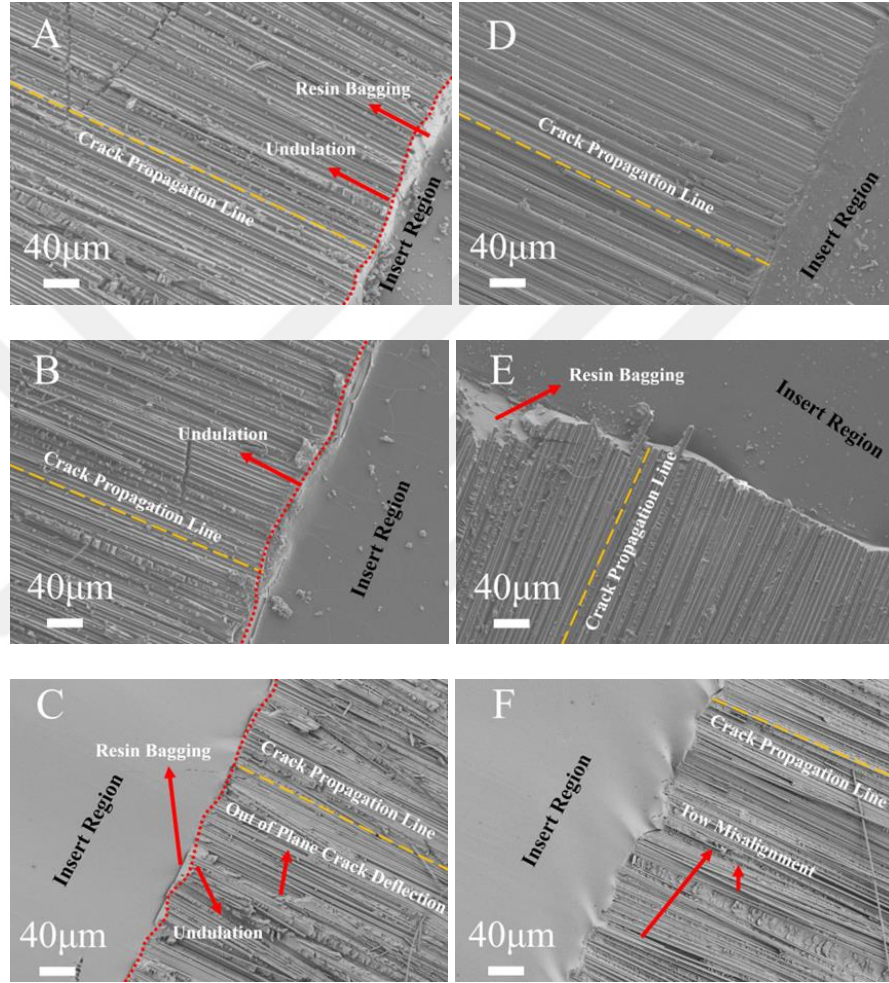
Fractography images belonging to the pre-cracked region of fractured ENF samples; left shows RT sample: (A) CFRP-CC resin; (B) CFRP-VI resin; (C) CFRP-T resin. Right shows LN2 sample: (D) CFRP-CC resin; (E) CFRP-VI resin; (F) CFRP-T resin.
